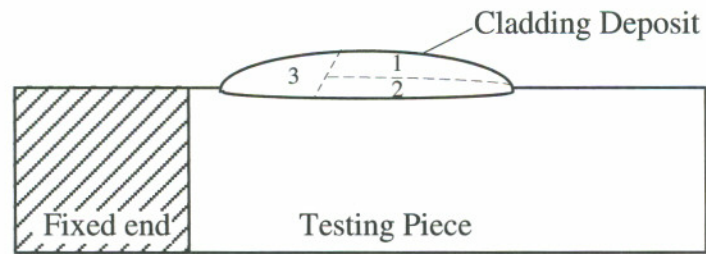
Illustration of Solidification Fracture Surface of the Solidification Cracking Test. Numbers 1, 2, and 3 indicate different fracture feature zones: zone 1 & 2 are solidification fracture regions, 3 is ductile overload fractured.
